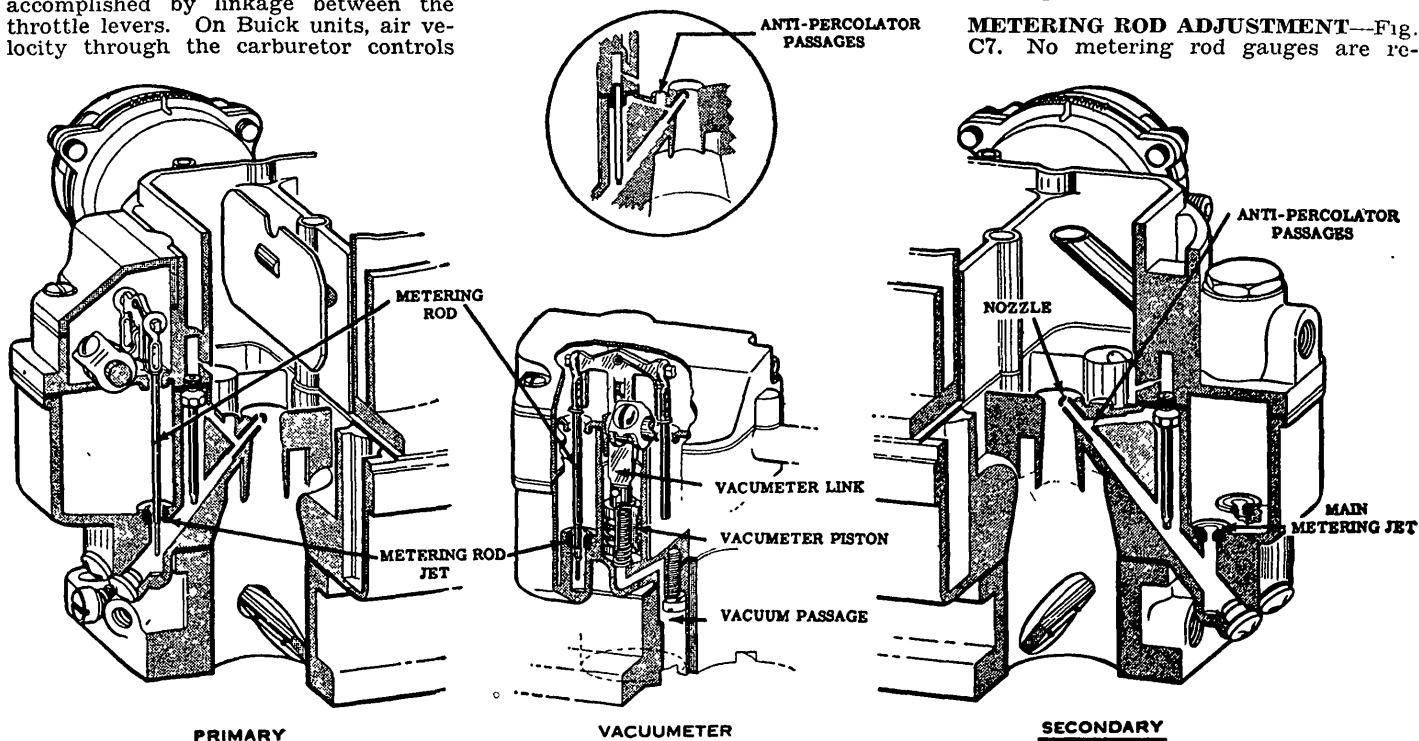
Carter WCFB high speed circuit on Oldsmobile. Buick employs auxiliary throttle valves above secondary throttle valves
